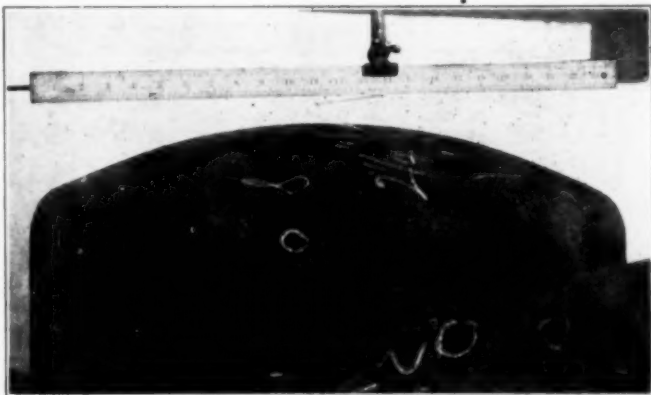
HEAD OF TANKS NOS. 1 TO 4, SHOWING RADIUS BEFORE TESTING
